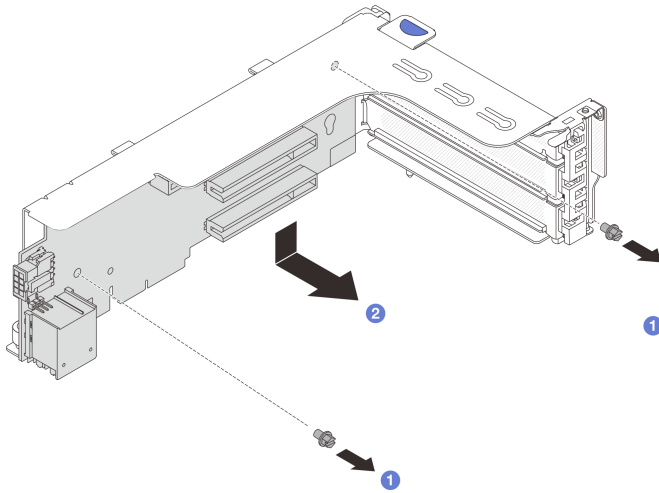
Removing the riser card from riser 1 cage or riser 2 cage
